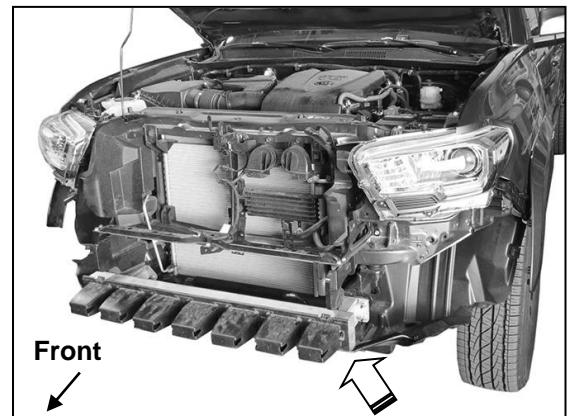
Pull end of bumper cover outward to release from fender and below headlight. Remove hardware attaching top of bumper cover below grille and remove bumper cover
